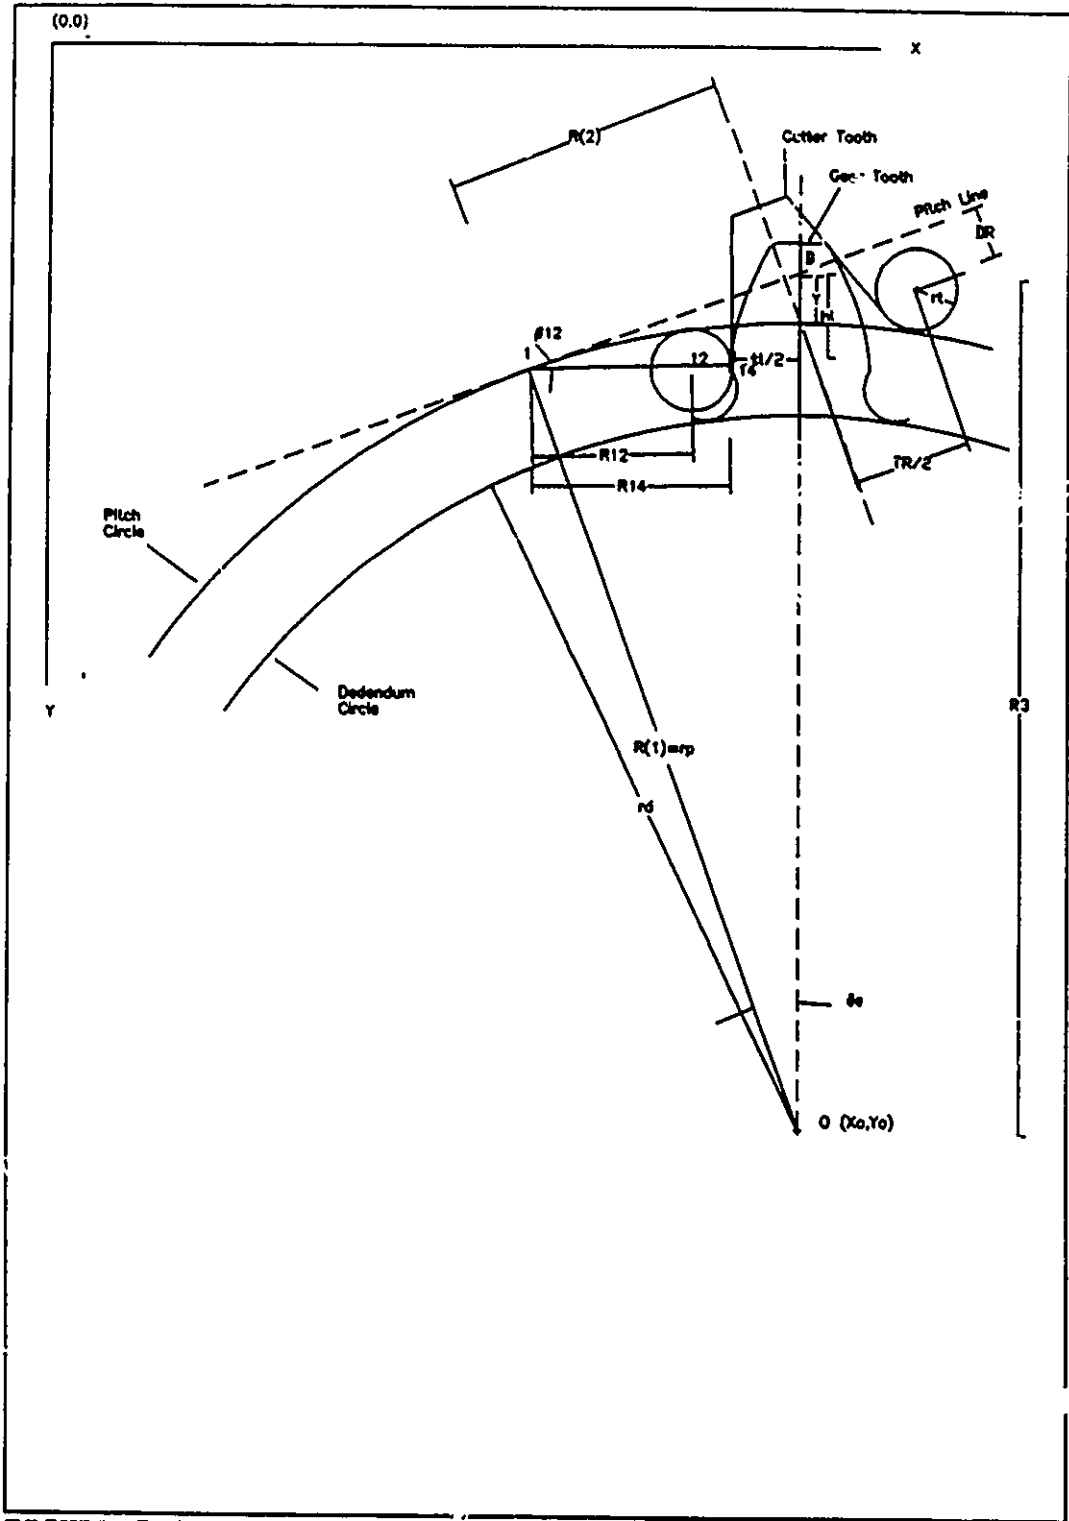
INSTANTANEOUS TOOTH CUTTER AND LOCALISED DIMENSIONS OF A GEAR TOOTH
